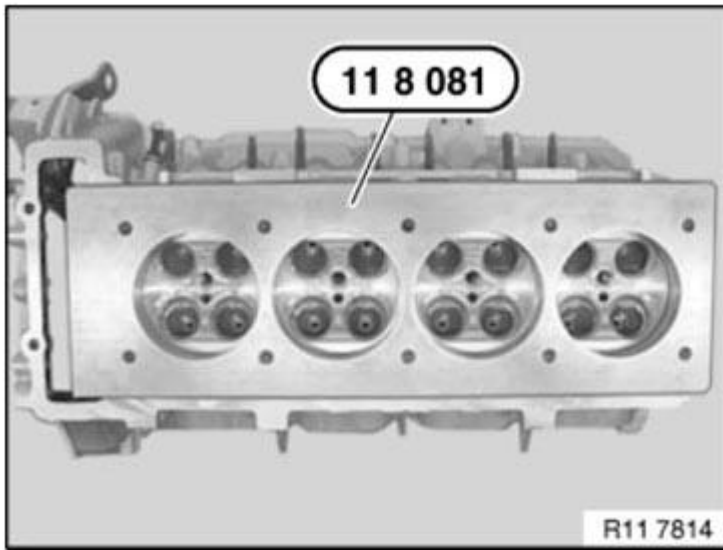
Positioning Special Tool 11 8 081 On Cylinder Head
